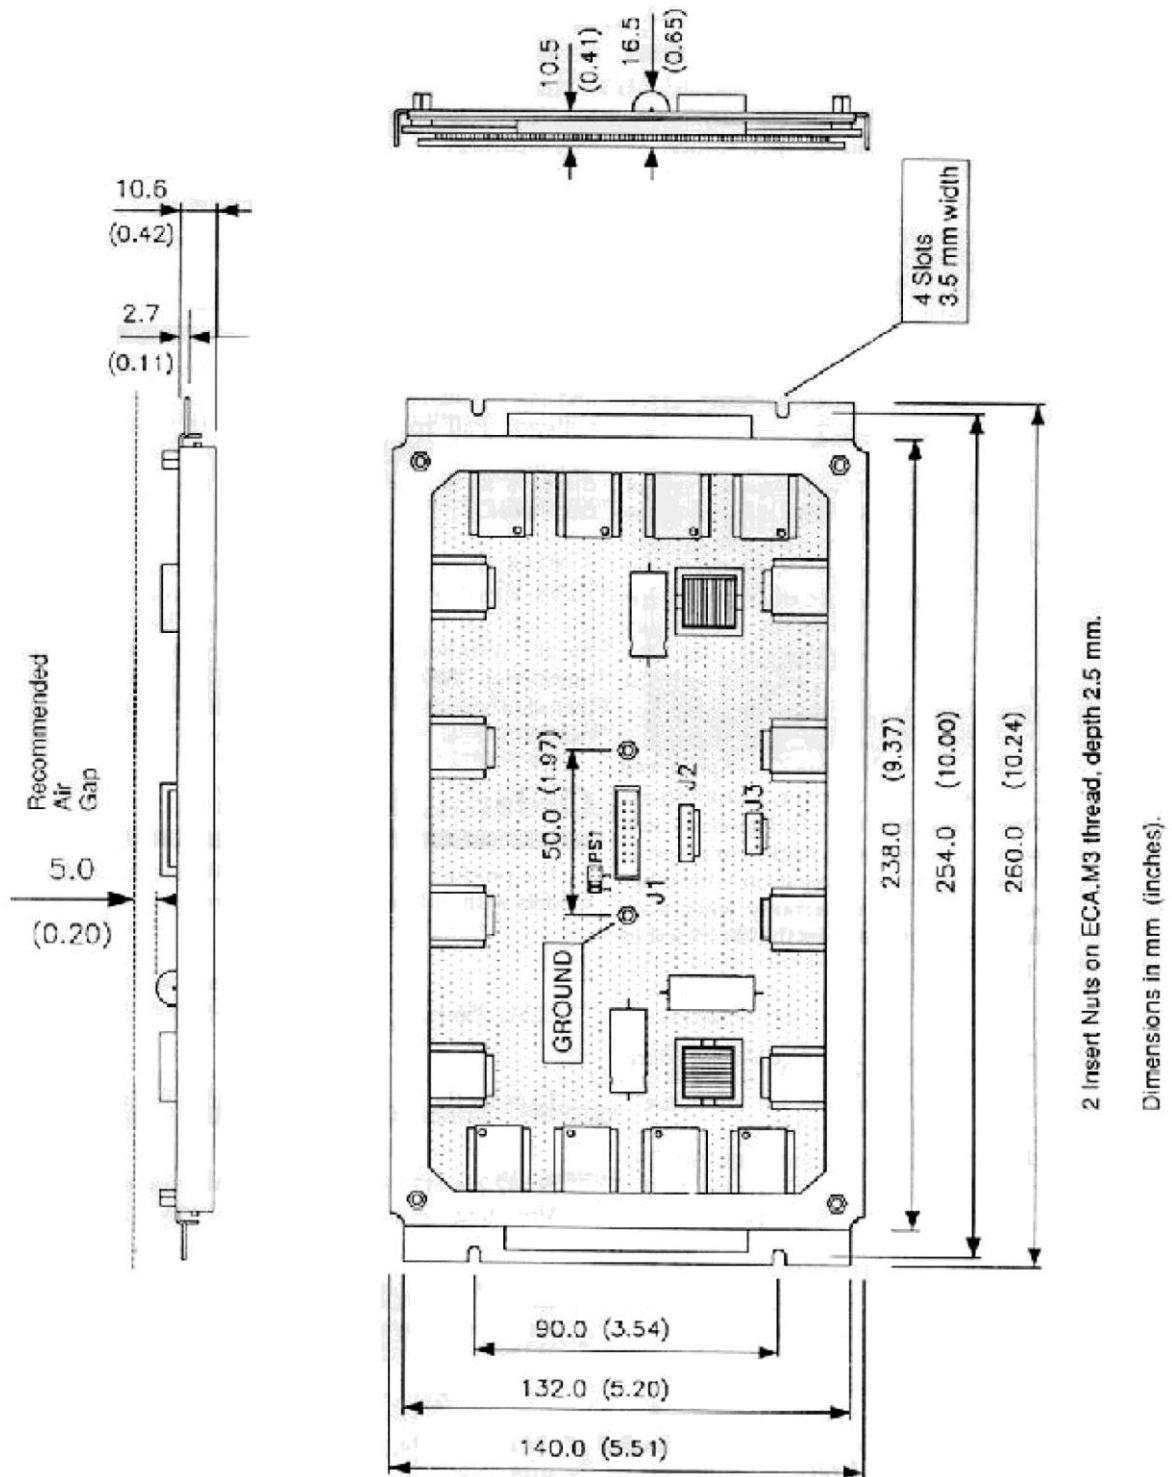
Back and side views with FRB steel mounting frame (dimensions in mm)
